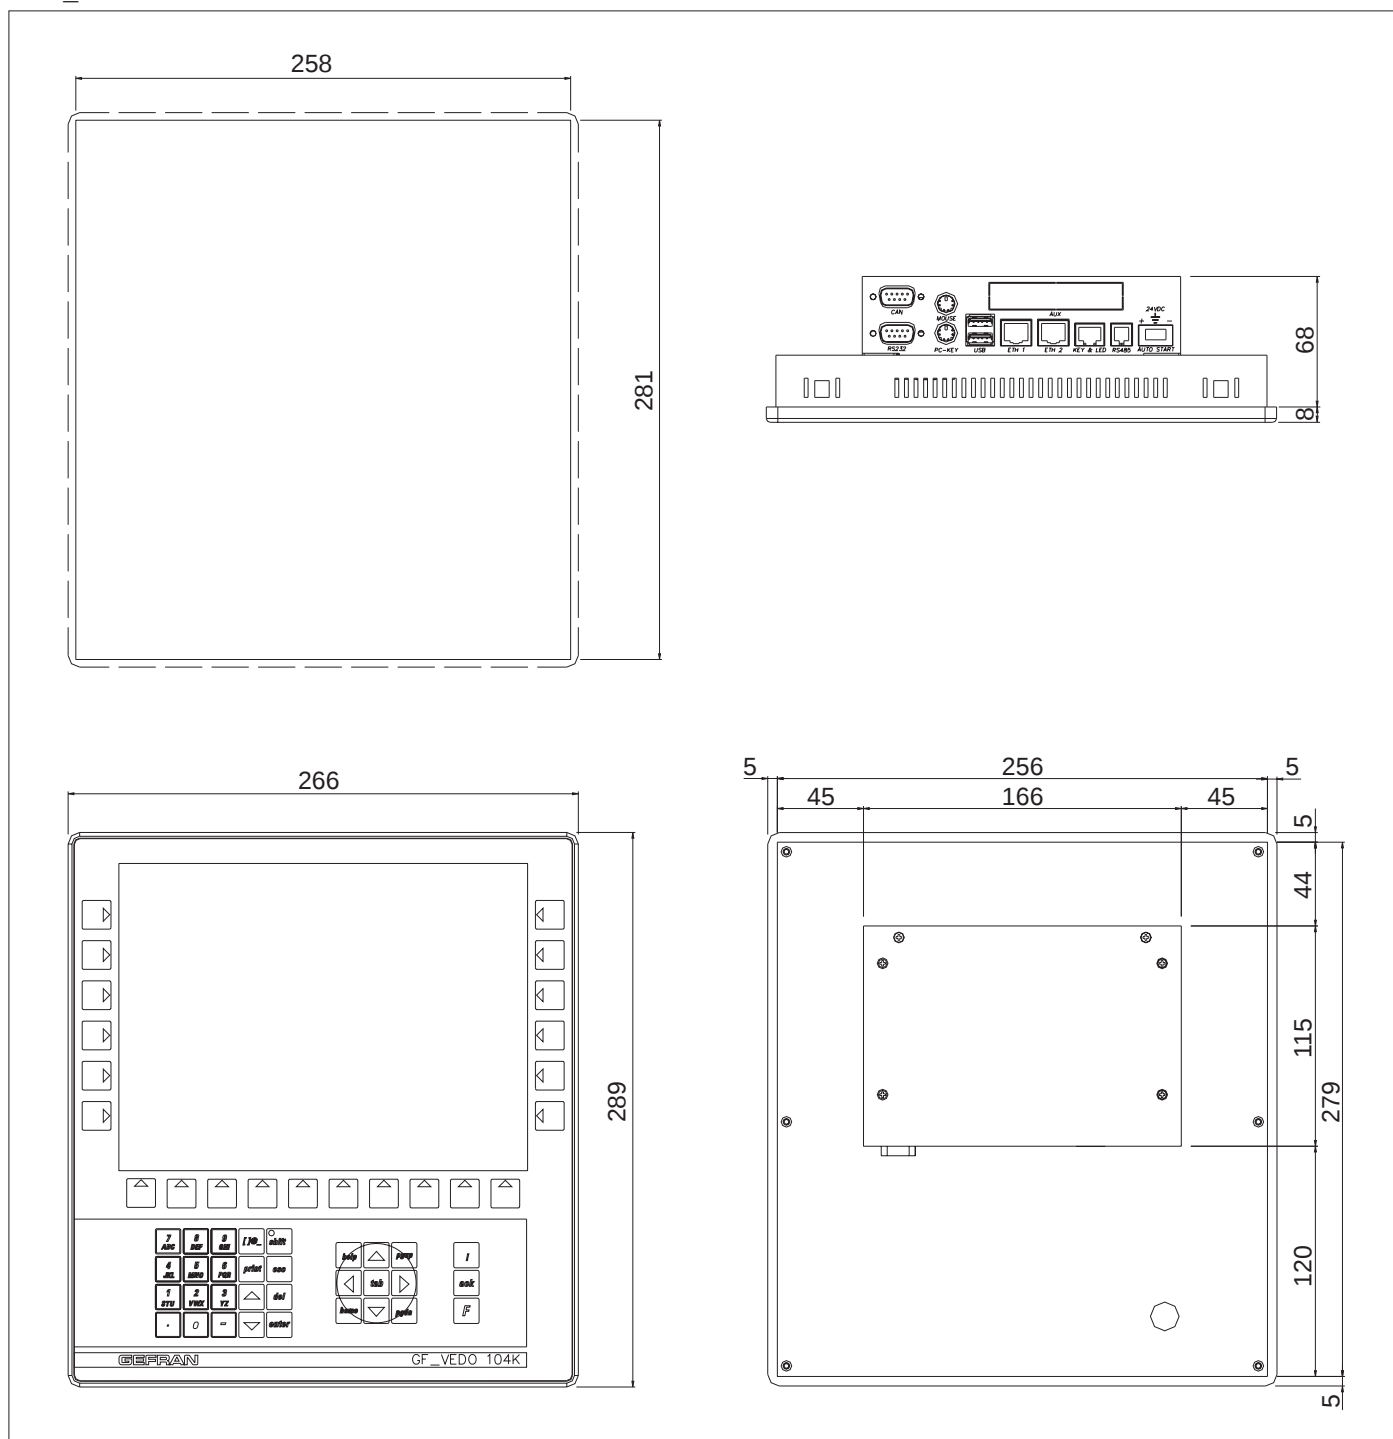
Dimensions and cut-out GF_VEDO 104CK
